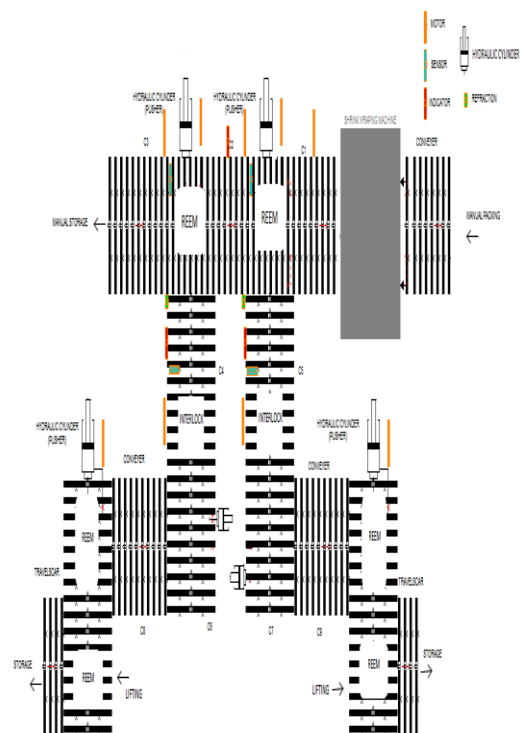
conveyor setup for the movement of reams from shrink wrapping machine to the storage system
